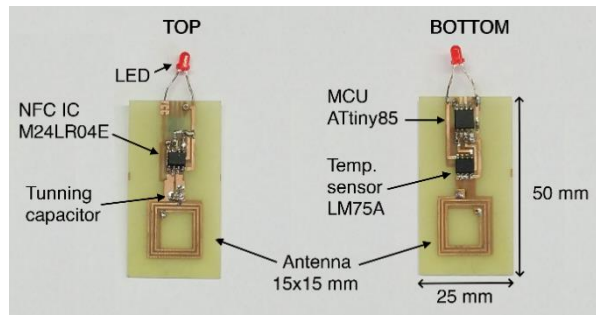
Photograph of the tag manufactured for measurements: top view (left) and bottom view (right).
